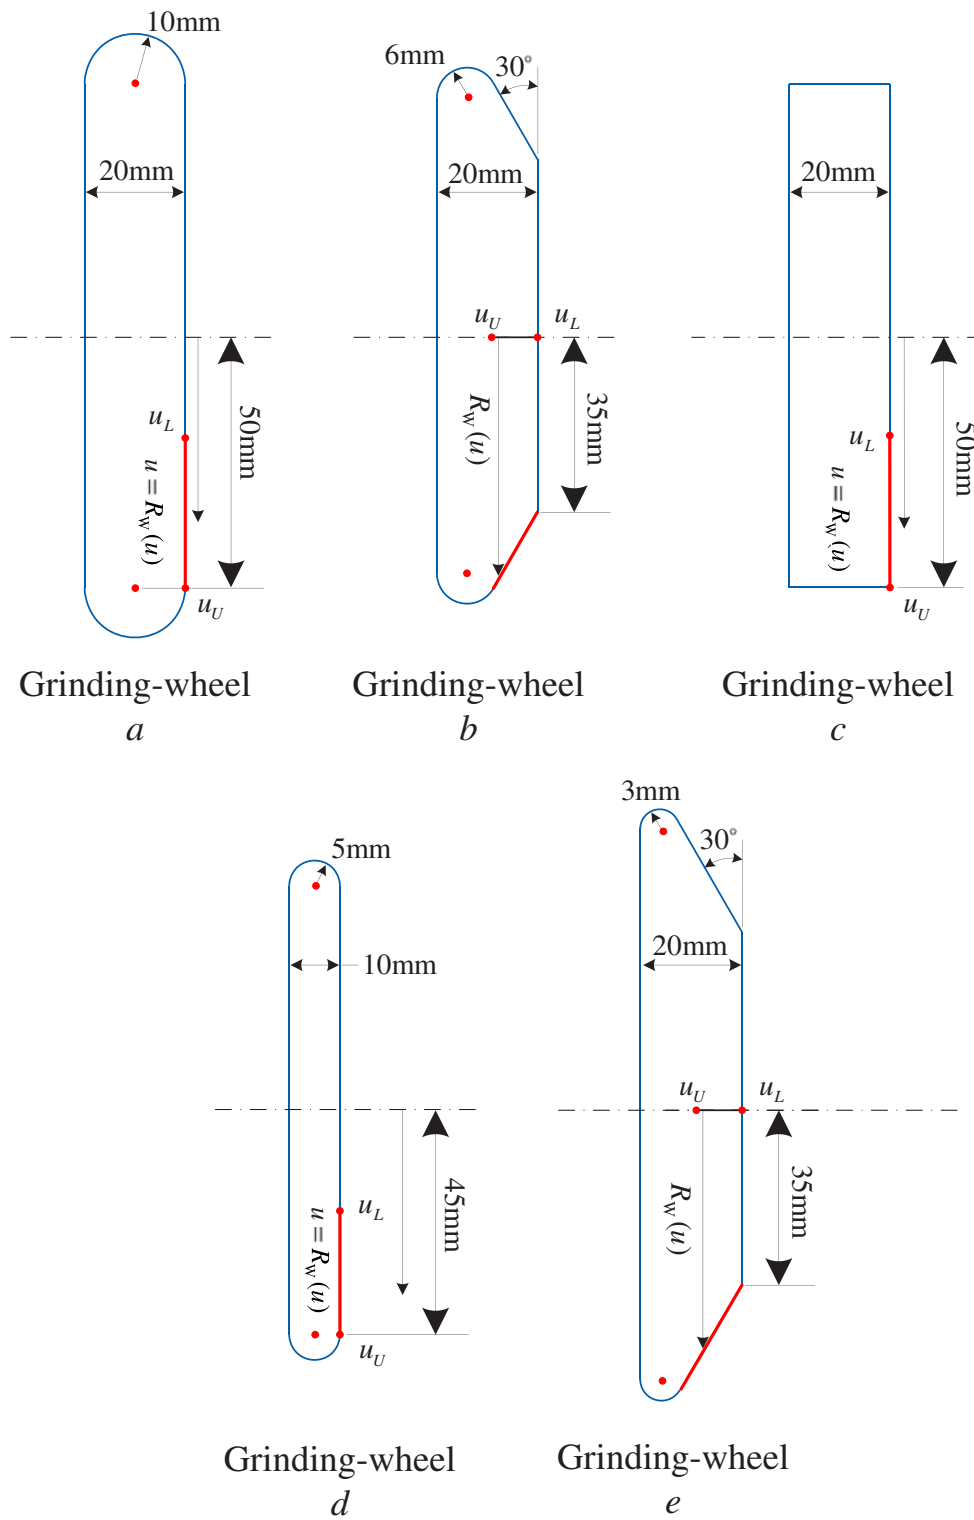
Standard grinding-wheels used to grind the end-mill flutes.
